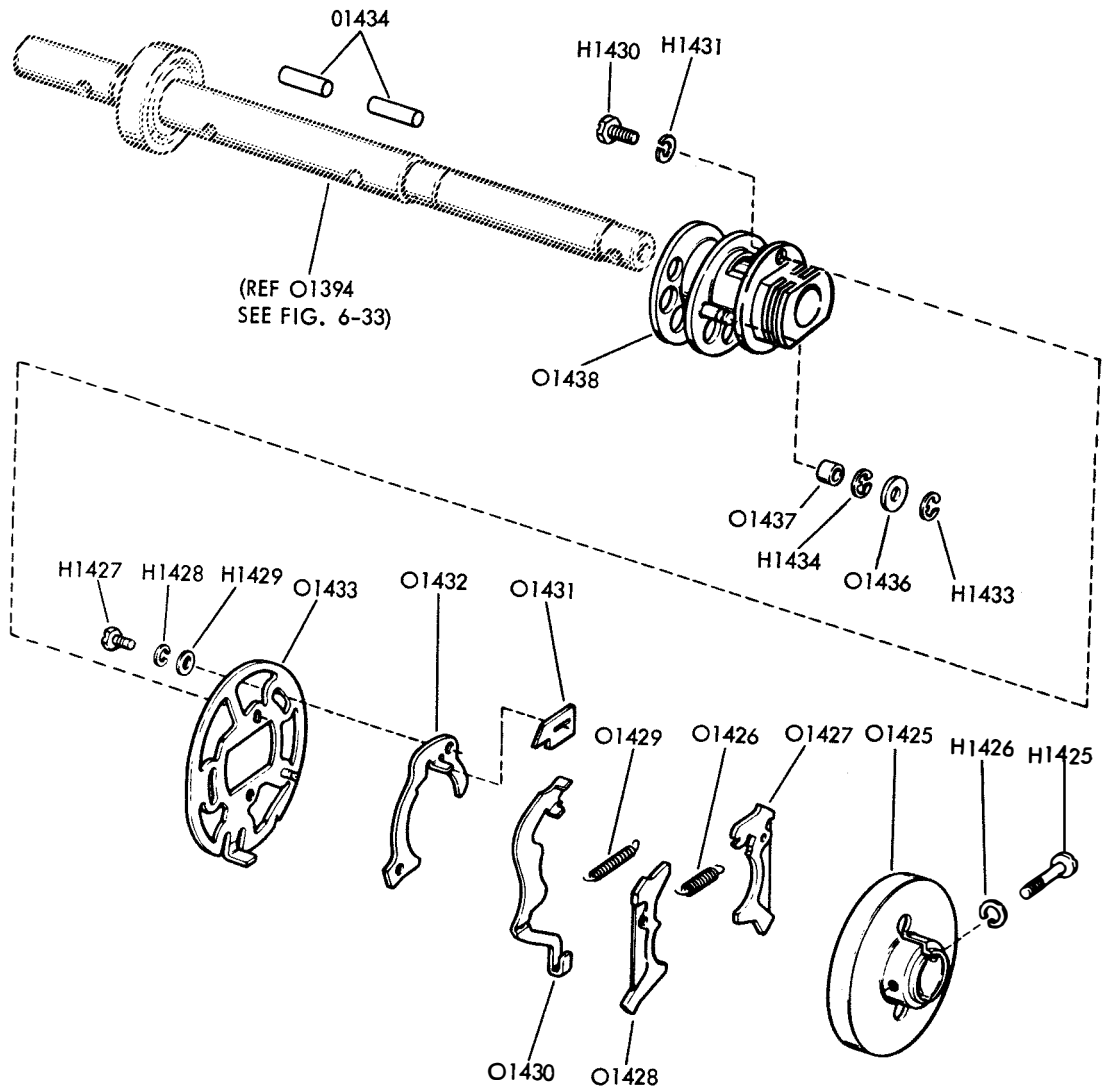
Typing Reperforator, Main Shaft Mechanism
